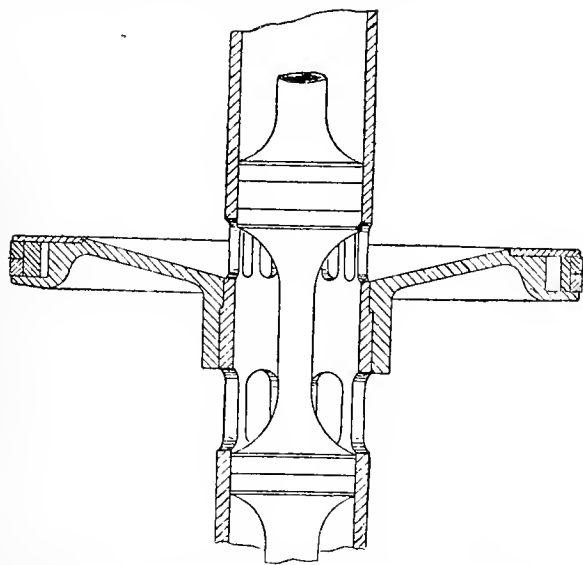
A SECTION OF THE PISTON OF A WILLANS CENTRAL VALVE ENGINE.
